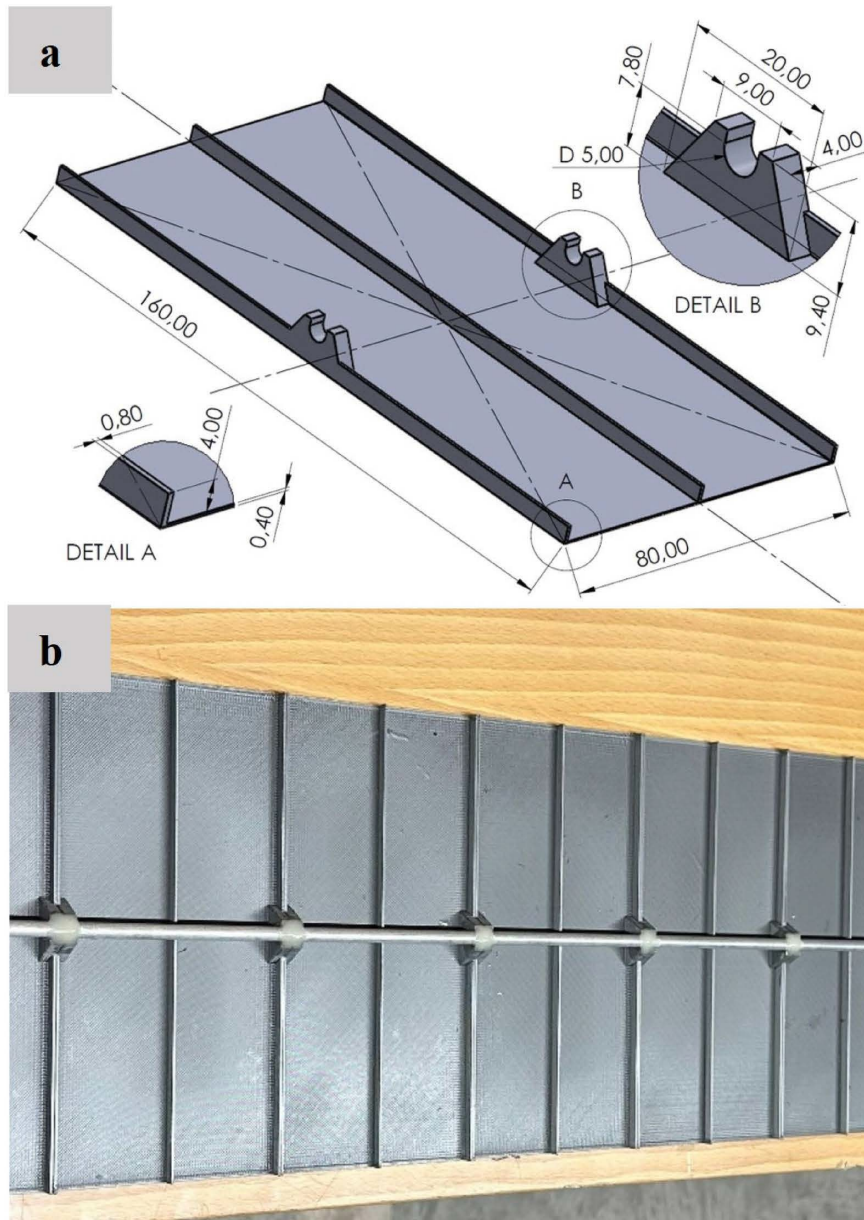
Scale model panels: a) technical drawing; b) assembly on aluminum torque tube.
